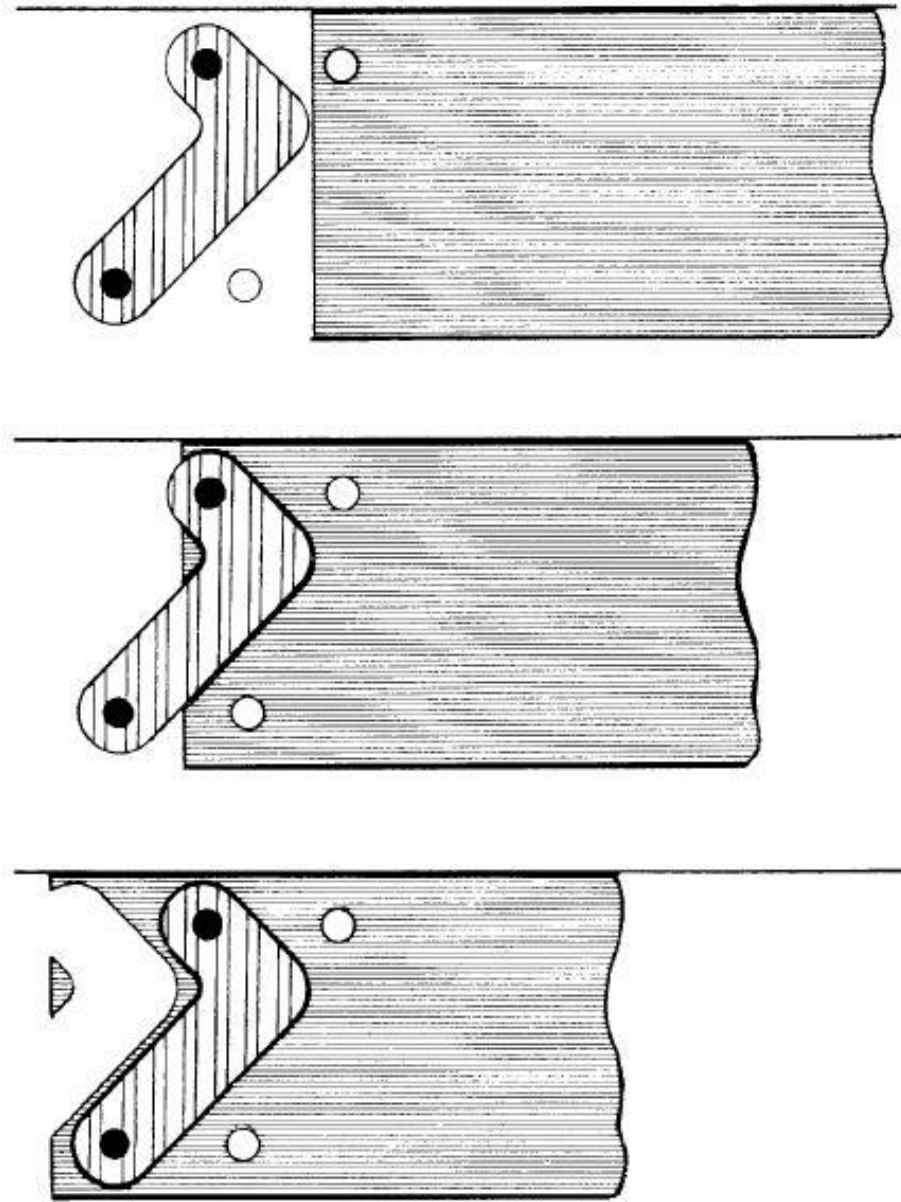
Testing the scrap strip for the third layout from Figure 6.14.
